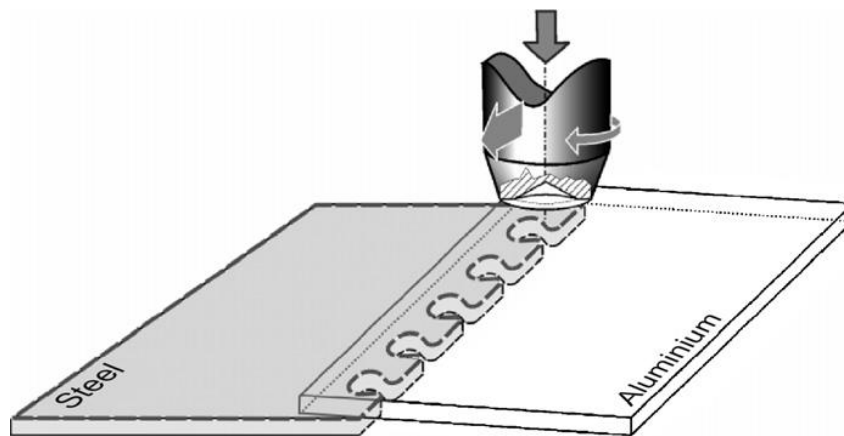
Principle of friction stir knead welding (Geiger et al., 2007).
